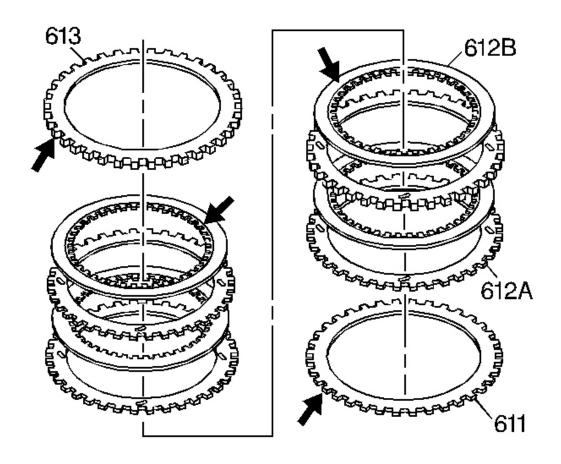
Inspecting Plates For Damage Or Wear Courtesy of GENERAL MOTORS CORP.
